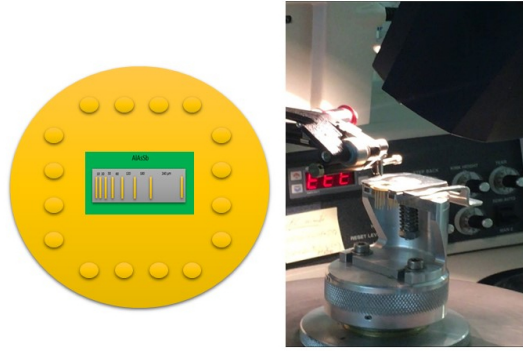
Schematic of the photo-conduction device on the To-8 chip carrier (Left-image). Picture of welding station (right-image), gold threads welded on metal groove reported on the To-8 pins.
